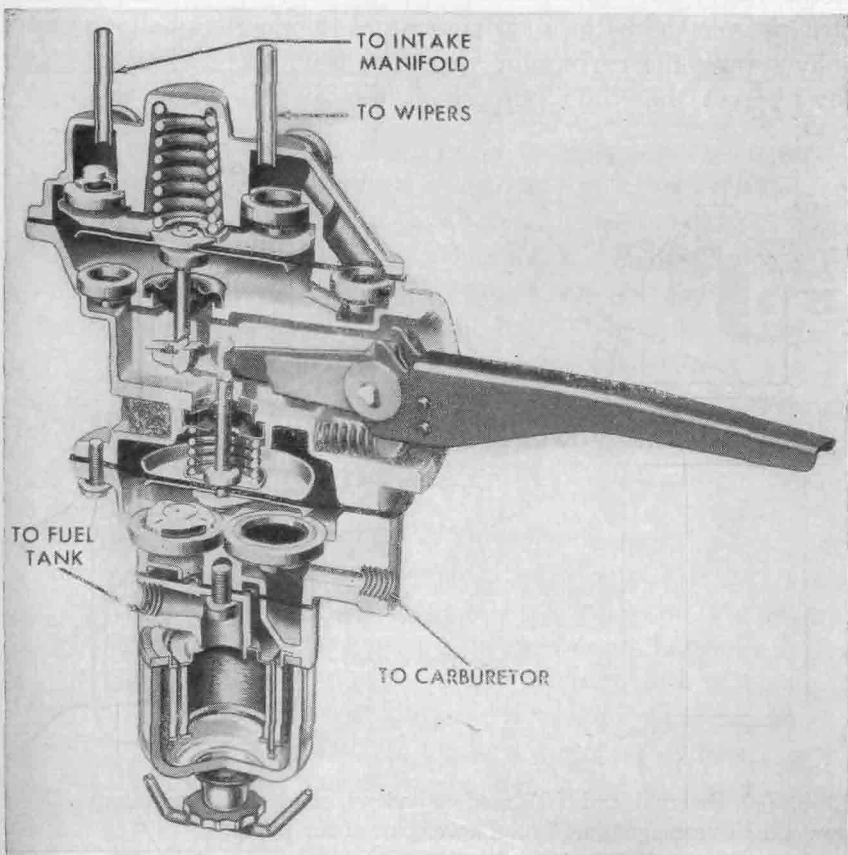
Cutaway view of fuel and vacuum pump. The vacuum unit is at the top, the fuel pump at the bottom. (Mercury Division of Ford Motor Company)
